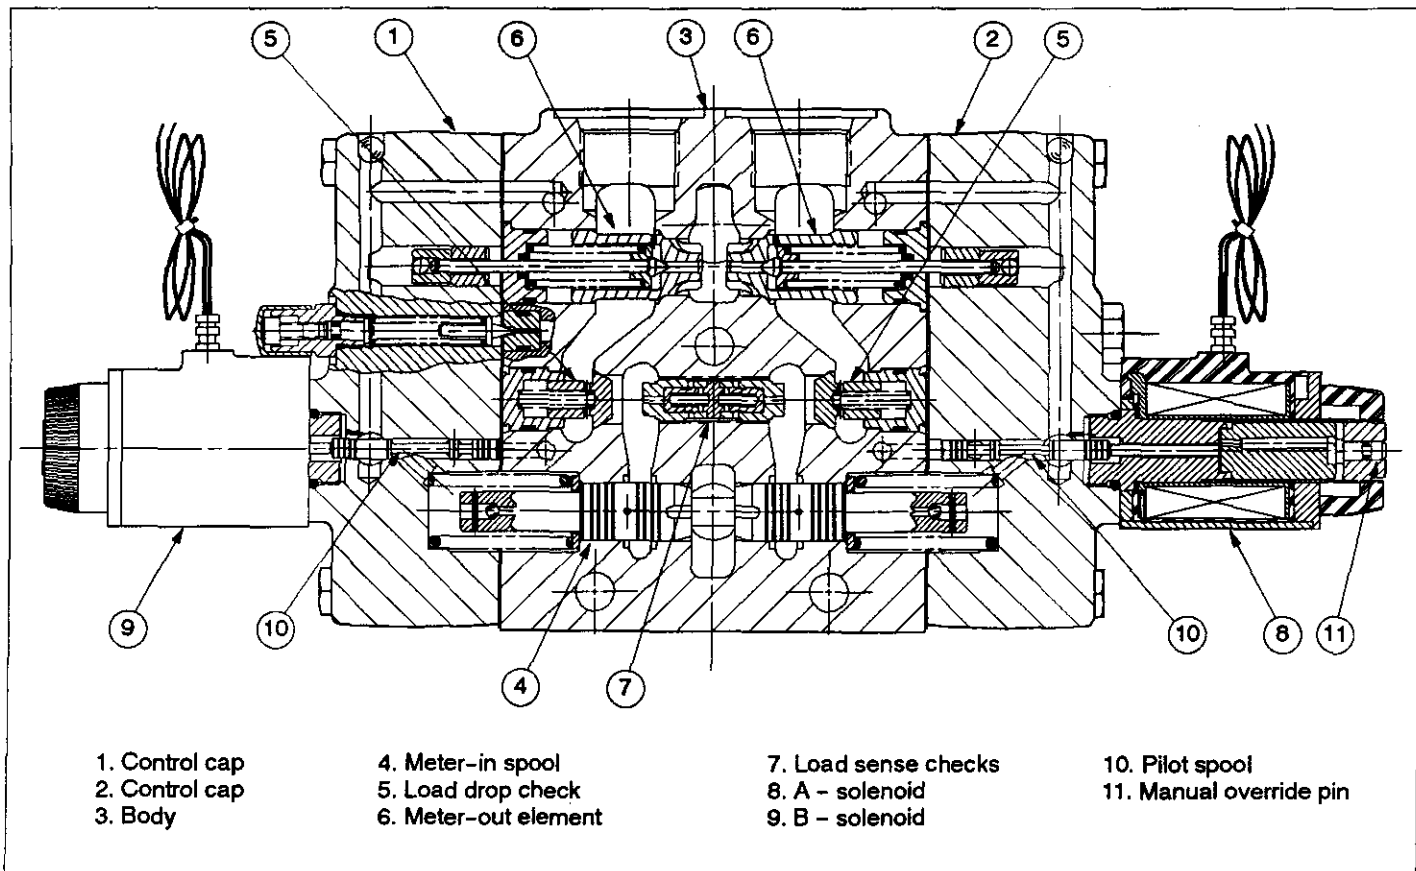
Sectional view showing a basic electrohydraulic valve section.
